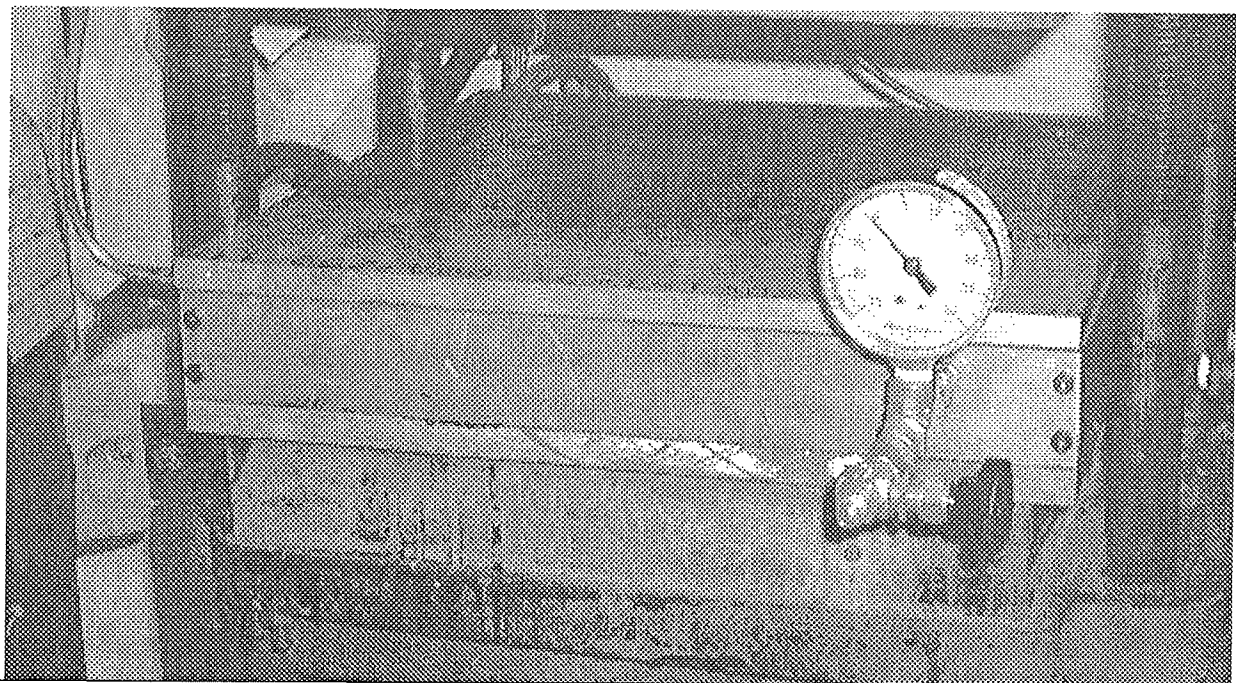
Full size 16 x 16-inch mold with vacuum.
